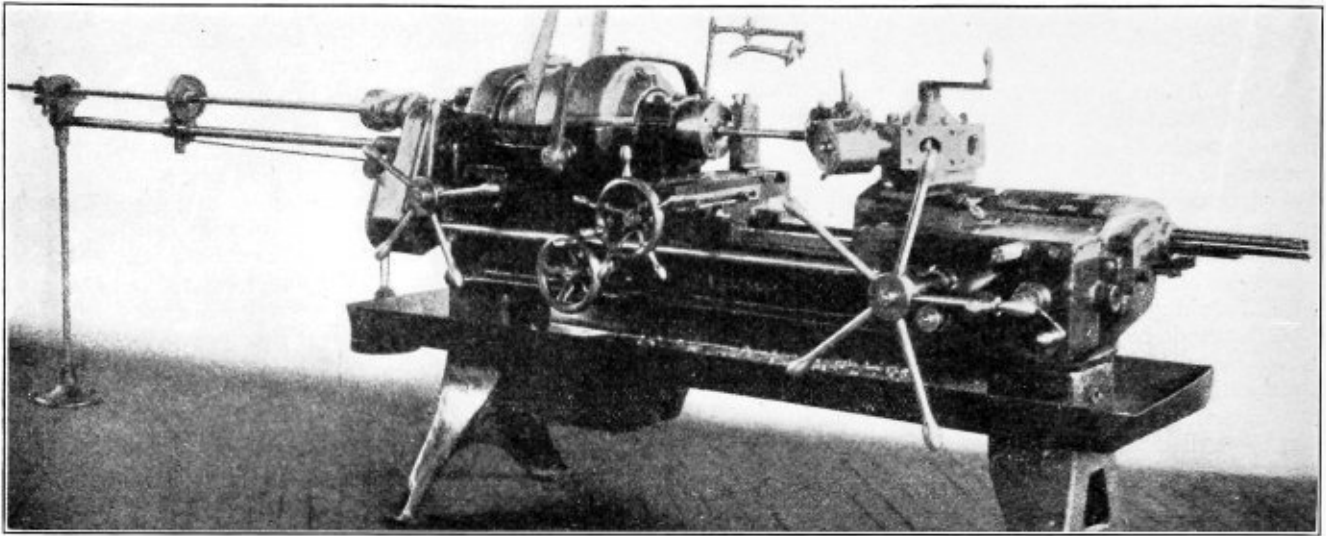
Threading and cutting off staybolts on a turret lathe, thus eliminating extra handling of the bars
